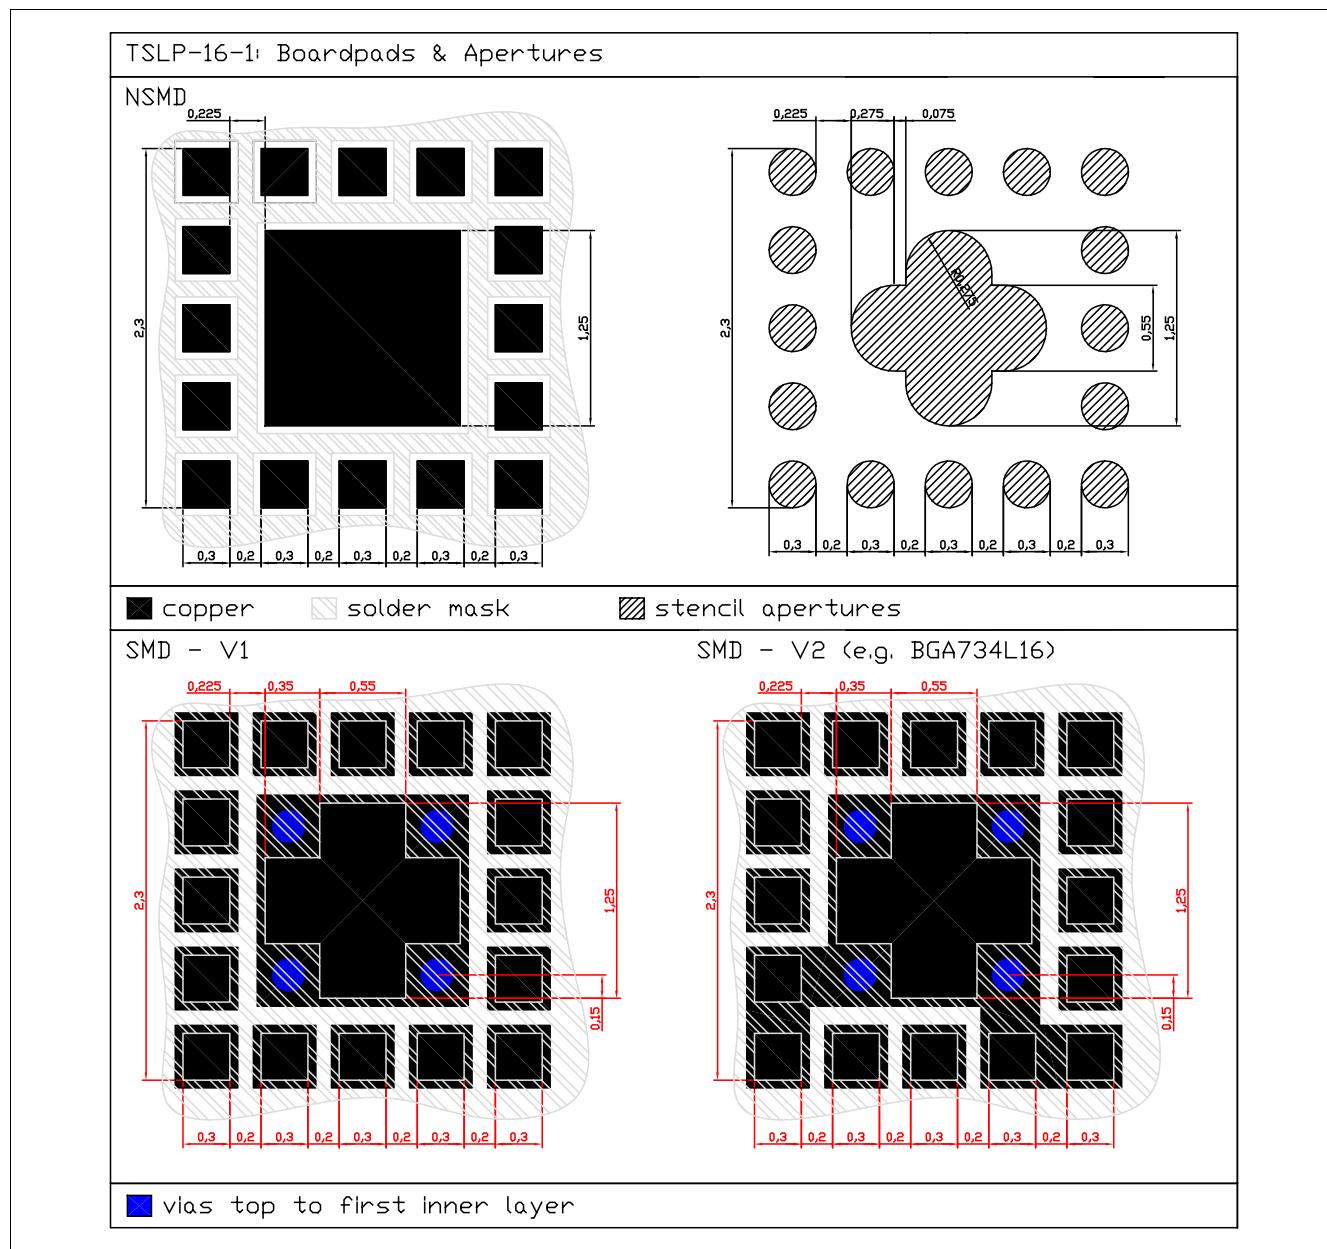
Recommended footprint and stencil layout for the TSLP-16-1 package.
